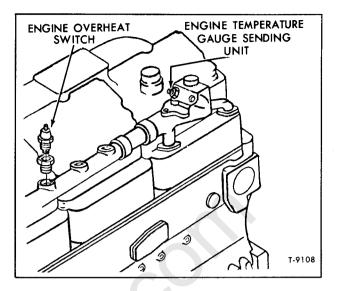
Temperature Gauge Sending Unit and Engine Overheat Switch (6 Cyl. Cummins Diesel Engine)
